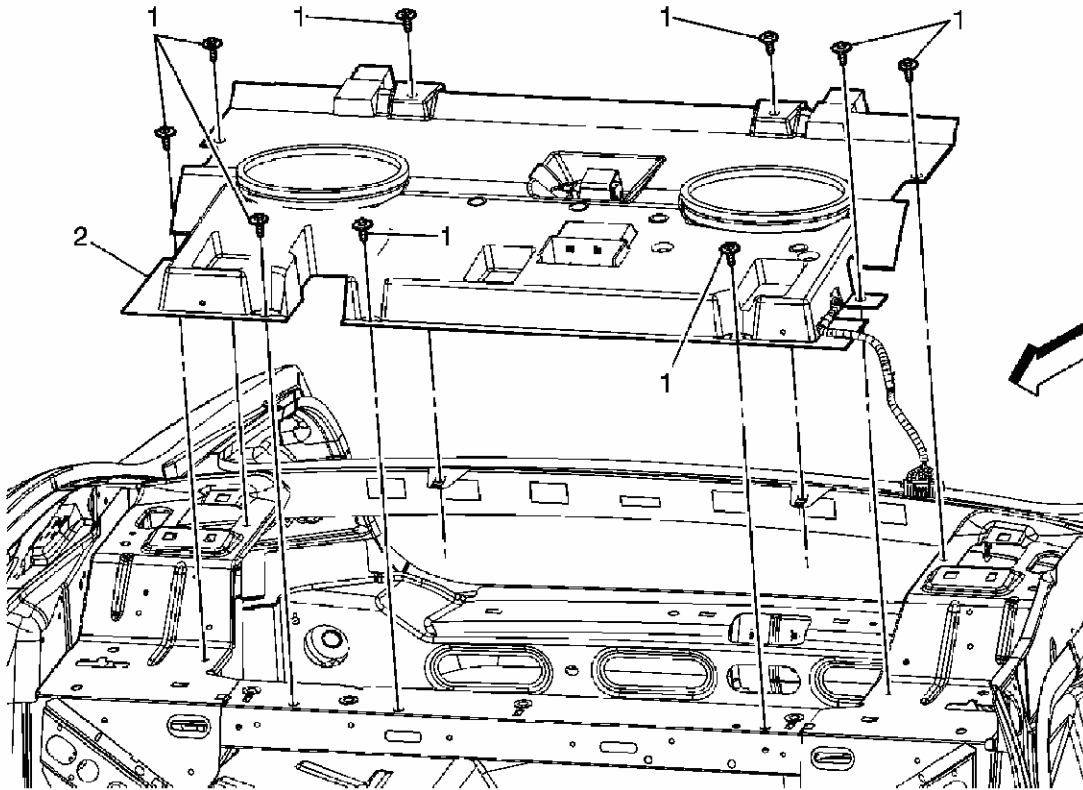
Removing/Installing Rear Shelf Trim Panel Carrier
